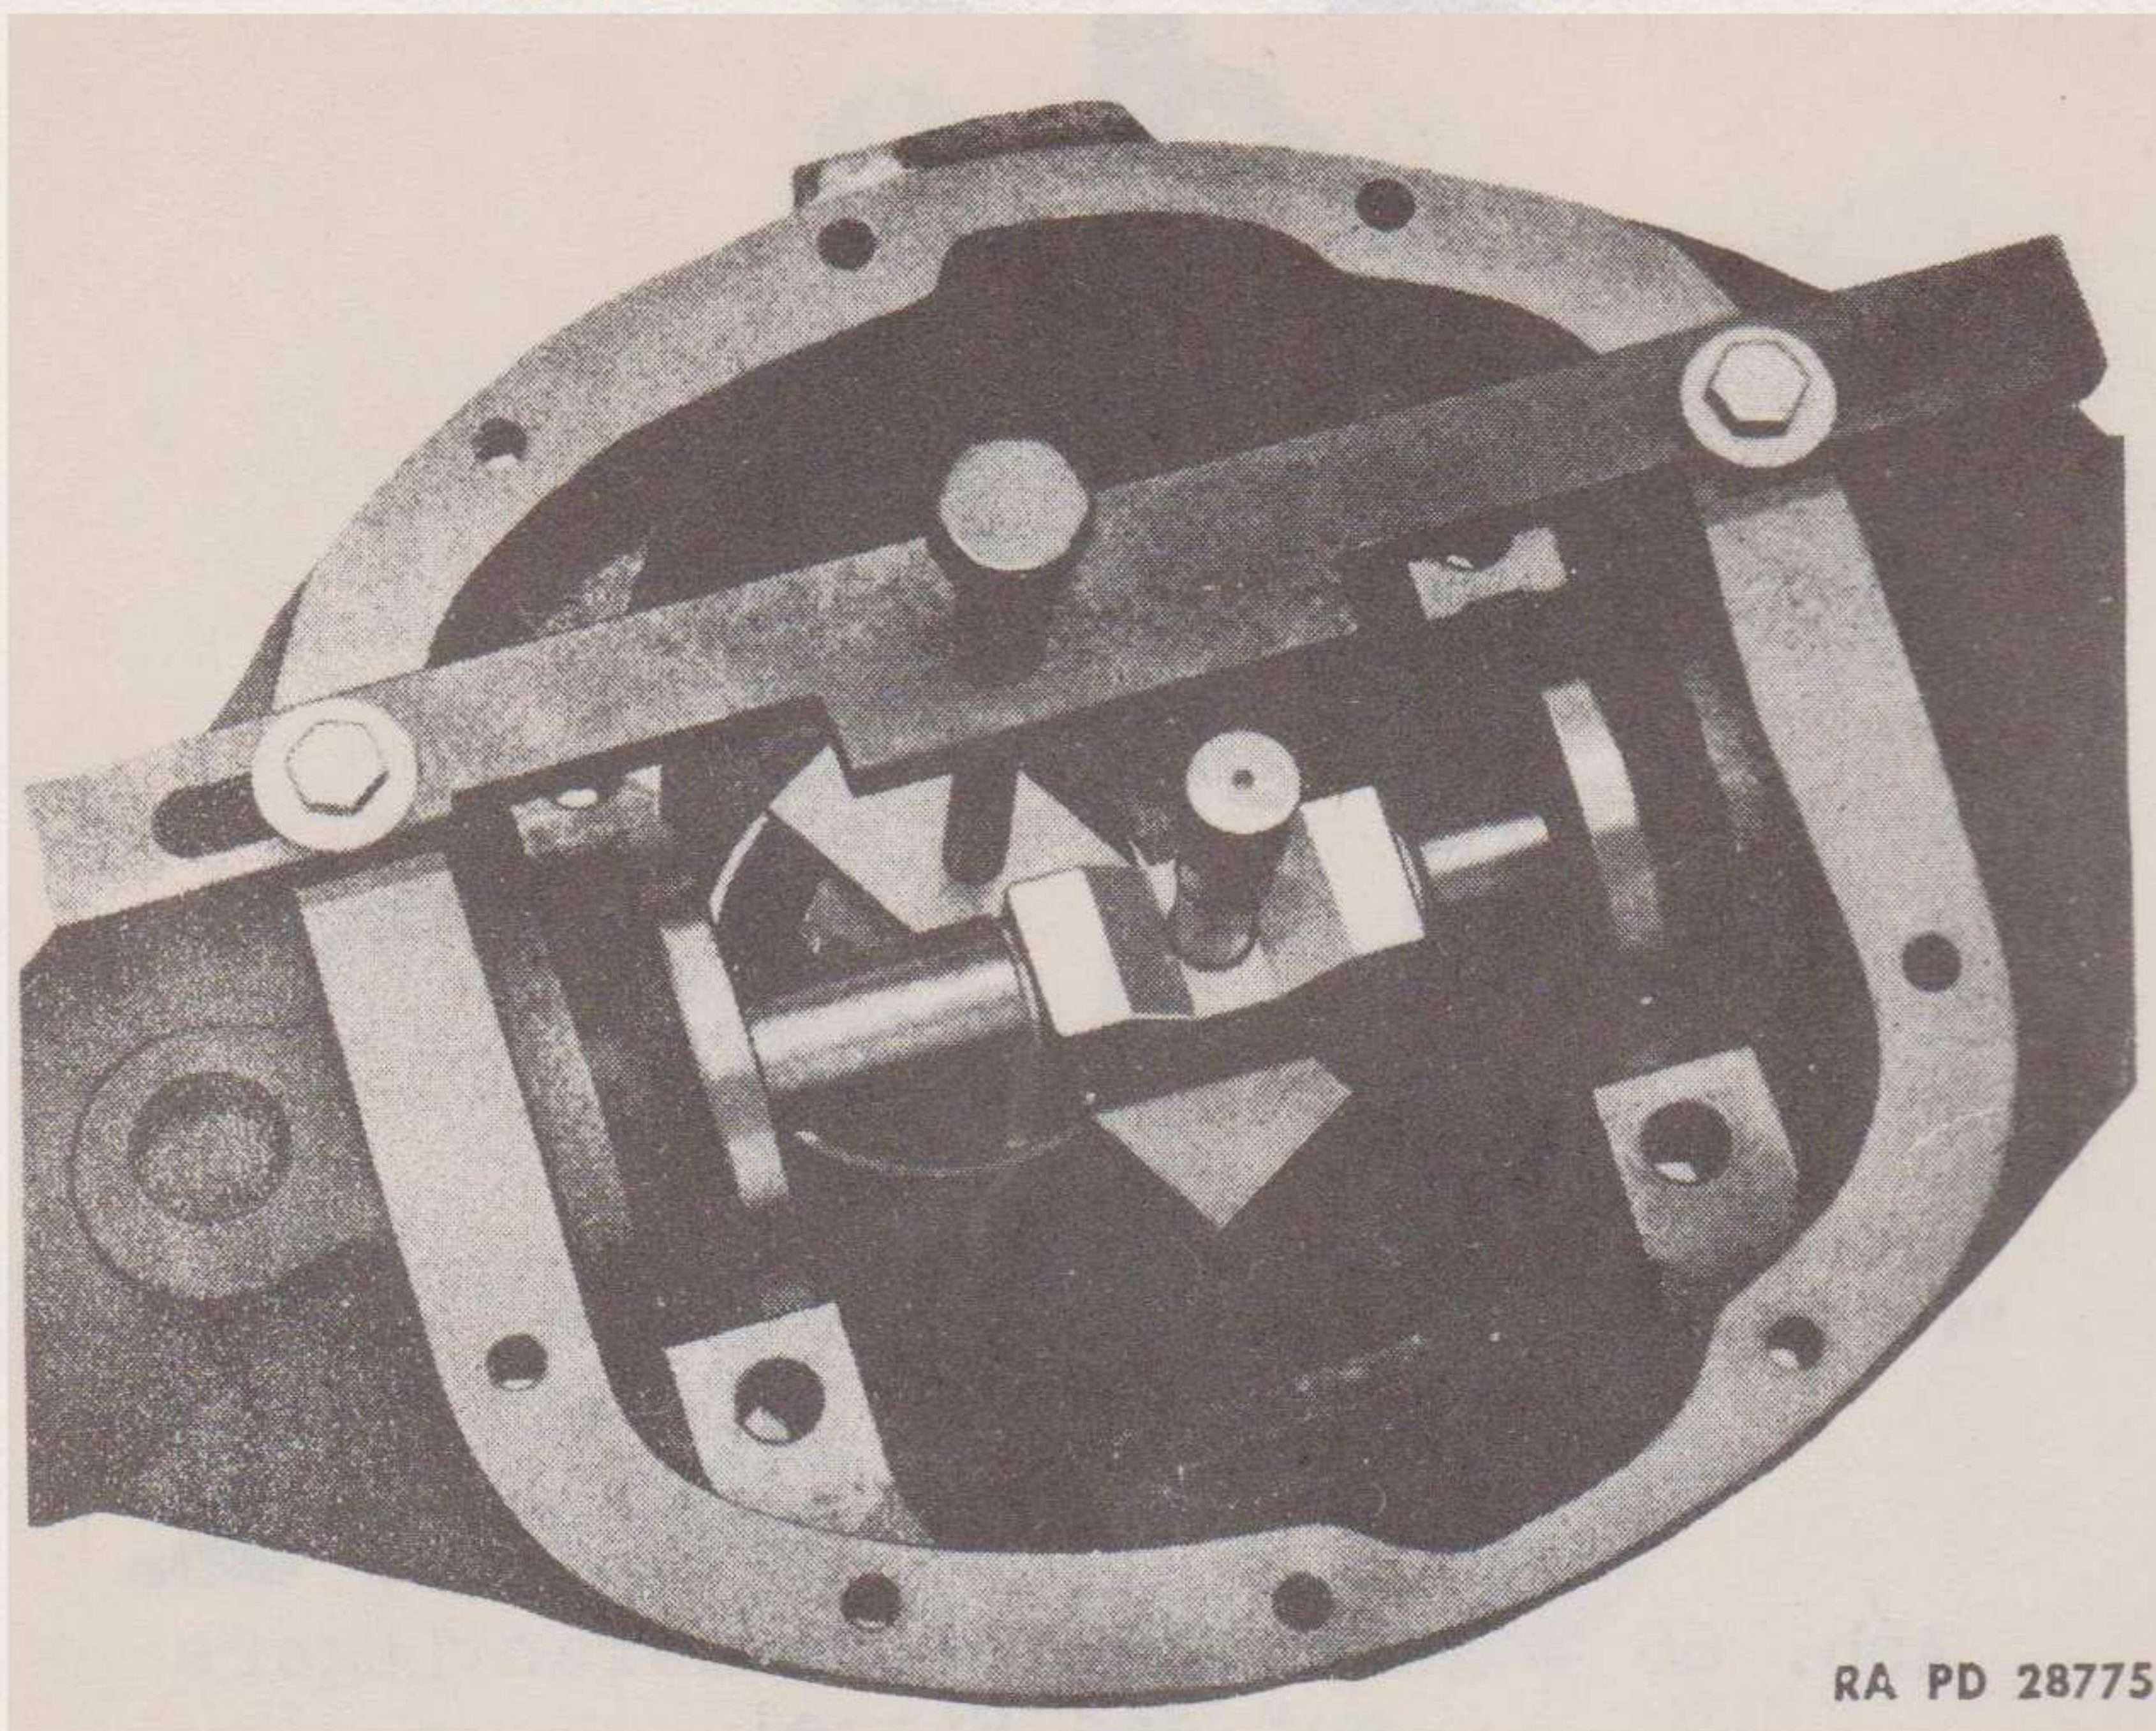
Checking Pinion in Differential Housing With Gage 41-G-176
